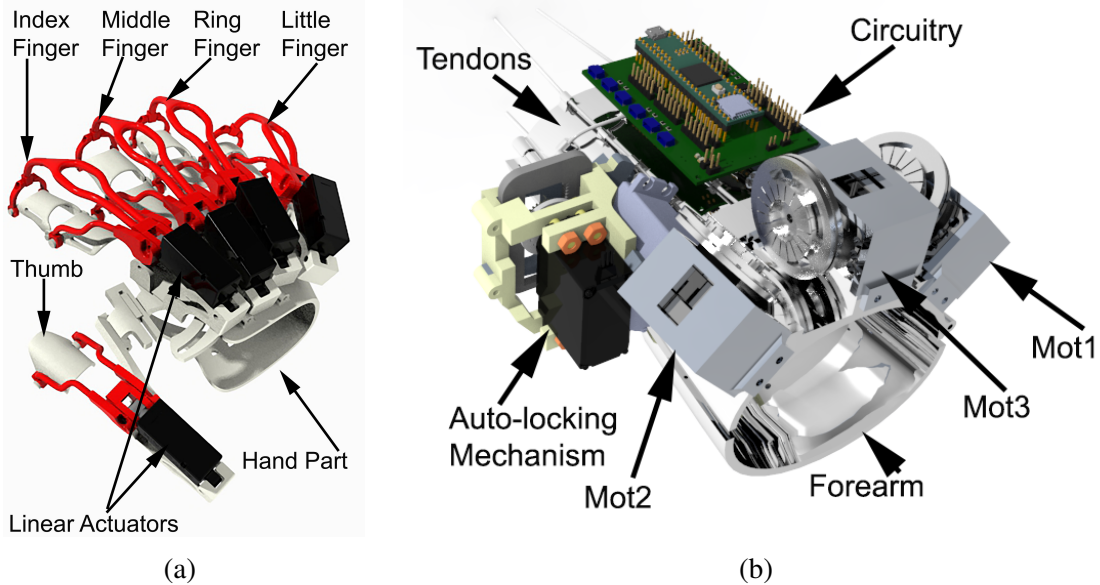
Exoskeleton prototype. (a) hand module; (b) hand/wrist integration CAD representation.
